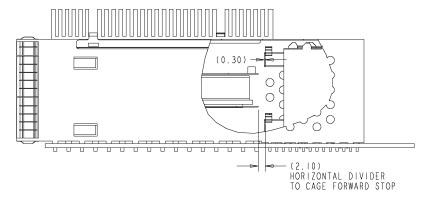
Horizontal divider to cage stop and connector (reference dimension)
